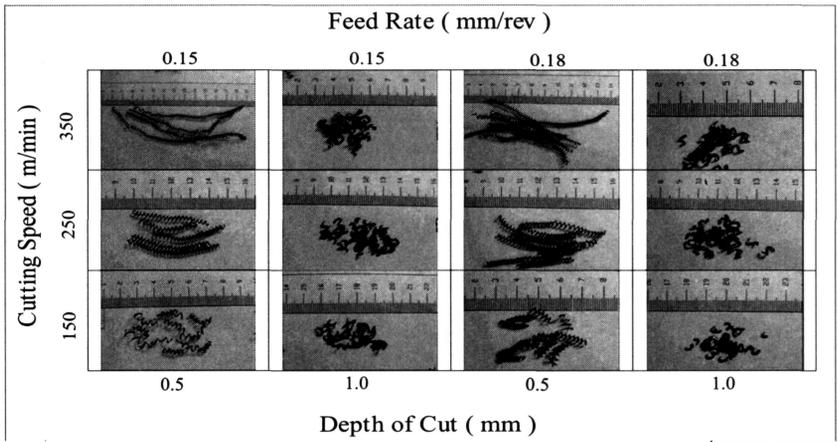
shows the examples of experimentally obtained photographs of the chips when the cutting tool is new with and without the different applications of cutting fluid under combinations of the cutting speeds, depths of cut and feed rates. The morphology of chip is classified into two types of continuous and broken. The broken chip disappears at higher cutting speeds of 250 and
